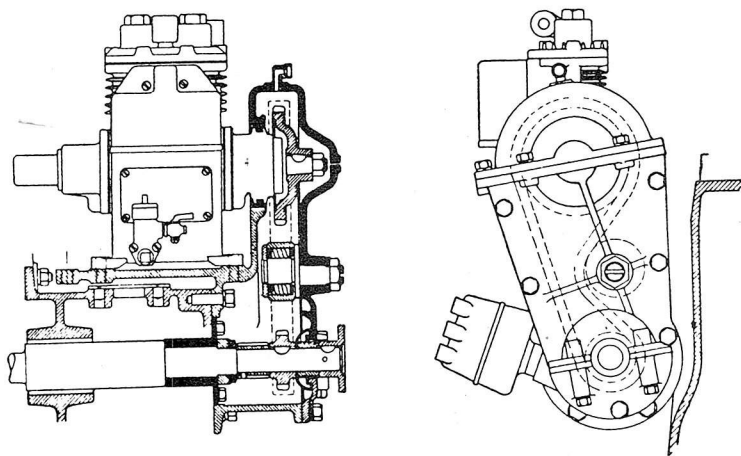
Diagram of Chain Drive Air Compressor Mounting of Early Design; Later Designs Have No Idler.
